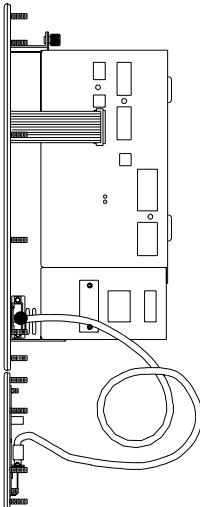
PanelMate 5000 Keypad Unit Side View
